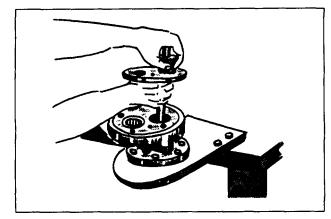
Drive Shaft, Inner Wear Plate and Seal Assembly being Installed in Adapter
